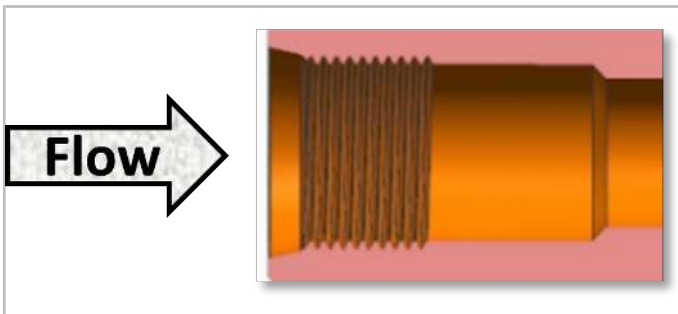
Cut-away view of the ECO port with corresponding flow direction on the GED8 series of scroll compressors (ORBIT FIT)
